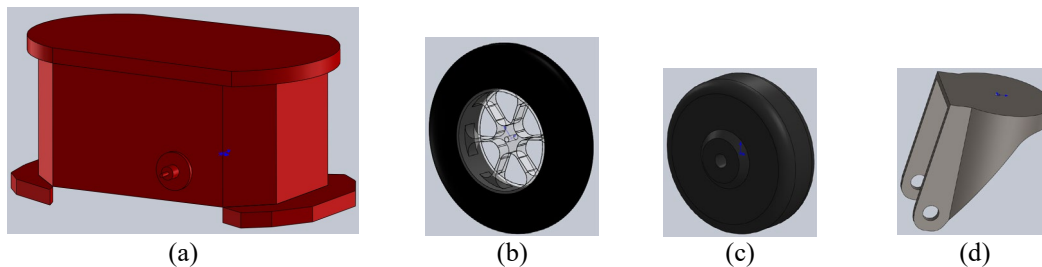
Components of the mobile robot and the ground part: (a) Chassis (a); (b) Two differential driven wheels; (c) Rear castor wheel; (d) For balancing and the castor wheel clamp.
